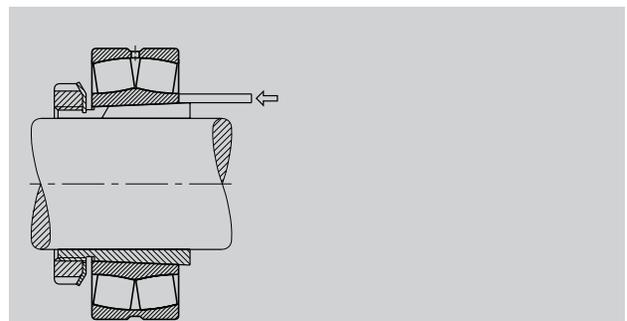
Dismounting of Adapter Sleeve by using Metal Drift
